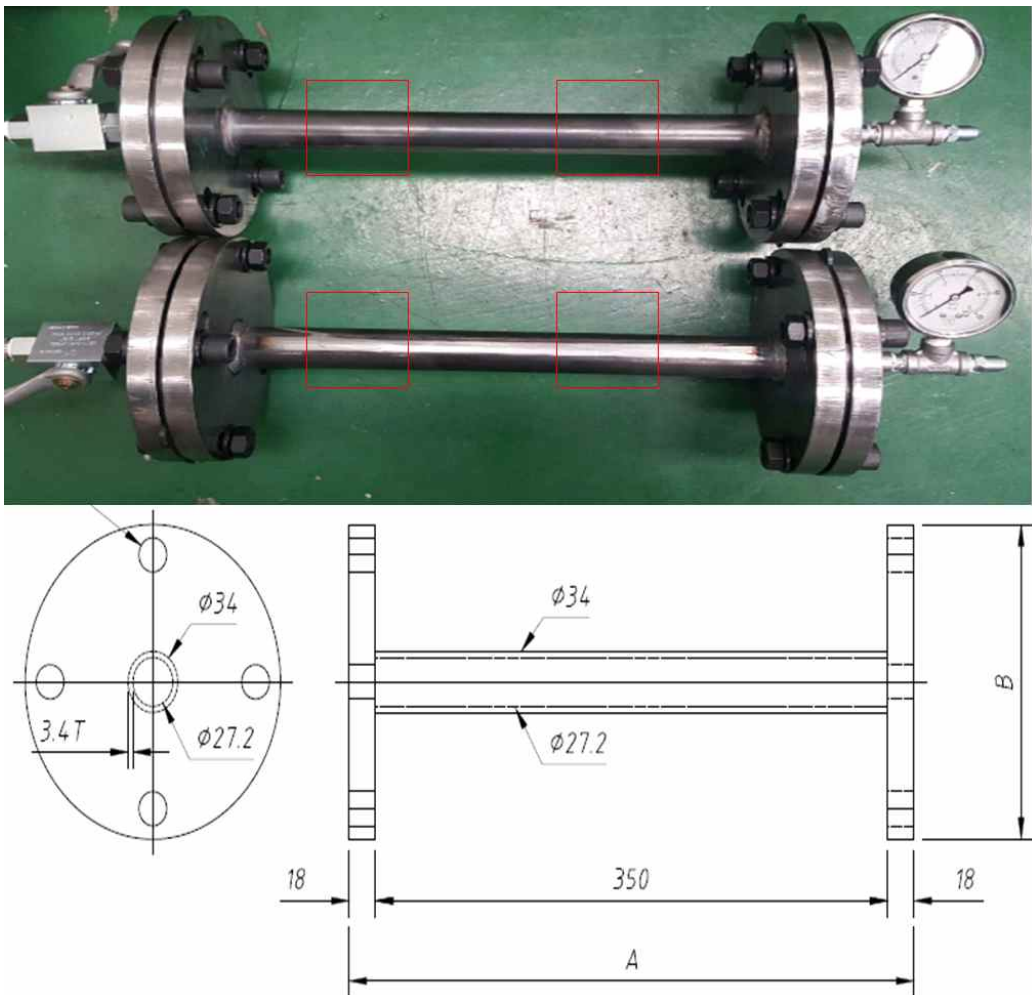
ASTM A53 Gr.B pressure pipe specimen
